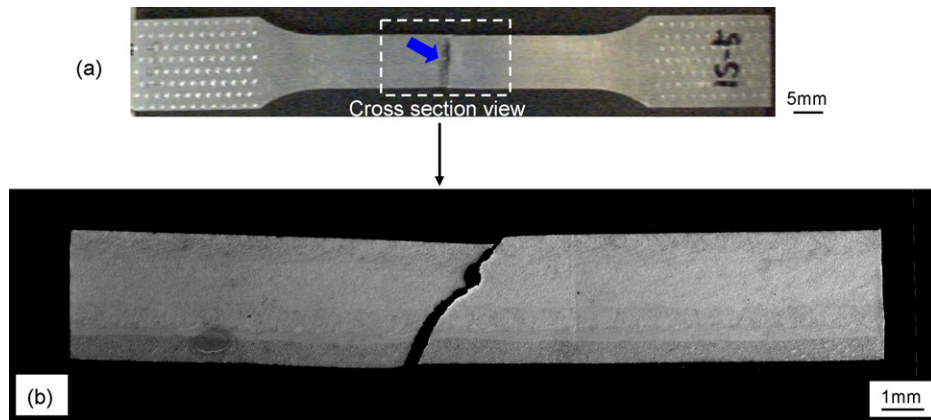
Tensile failure view of: (a) tensile test specimen of a parallel direction for MP-FSP and (b) cross-section showing fracture position.
